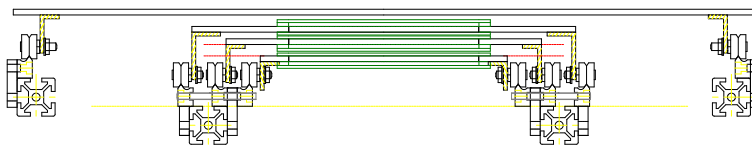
Filter-carriage assembled inside the system, view of inside the lamp-housing.
